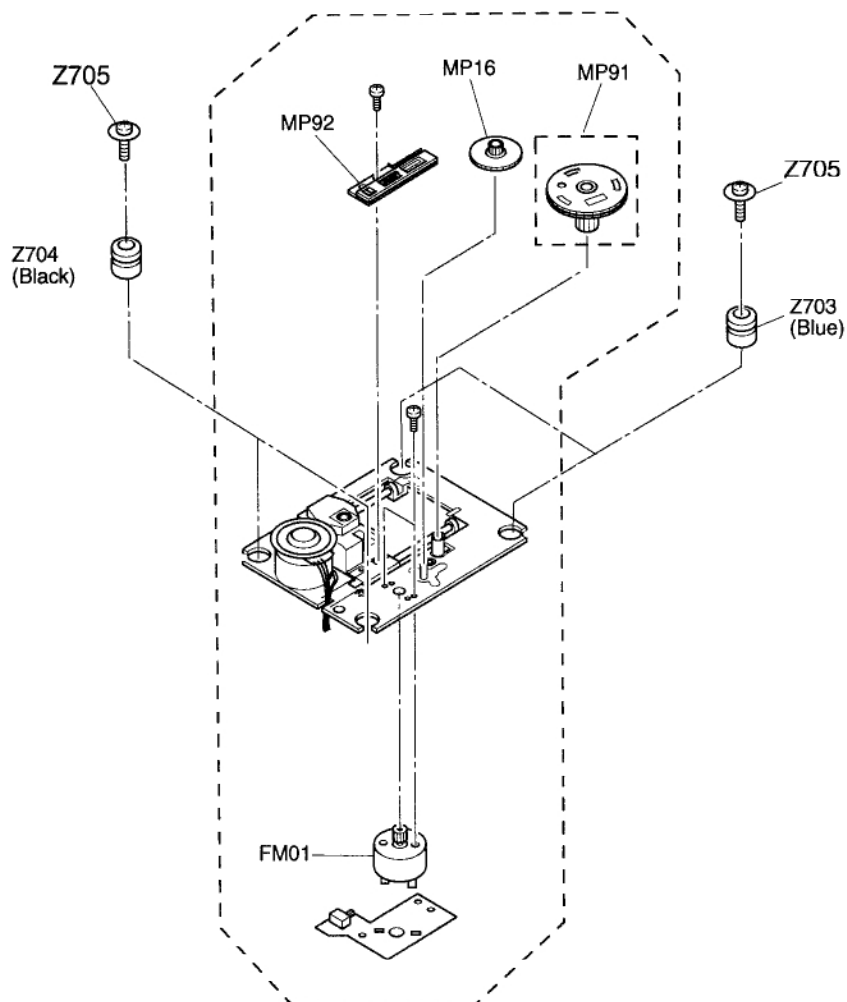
1-4-6. Loading Motor PC Board
